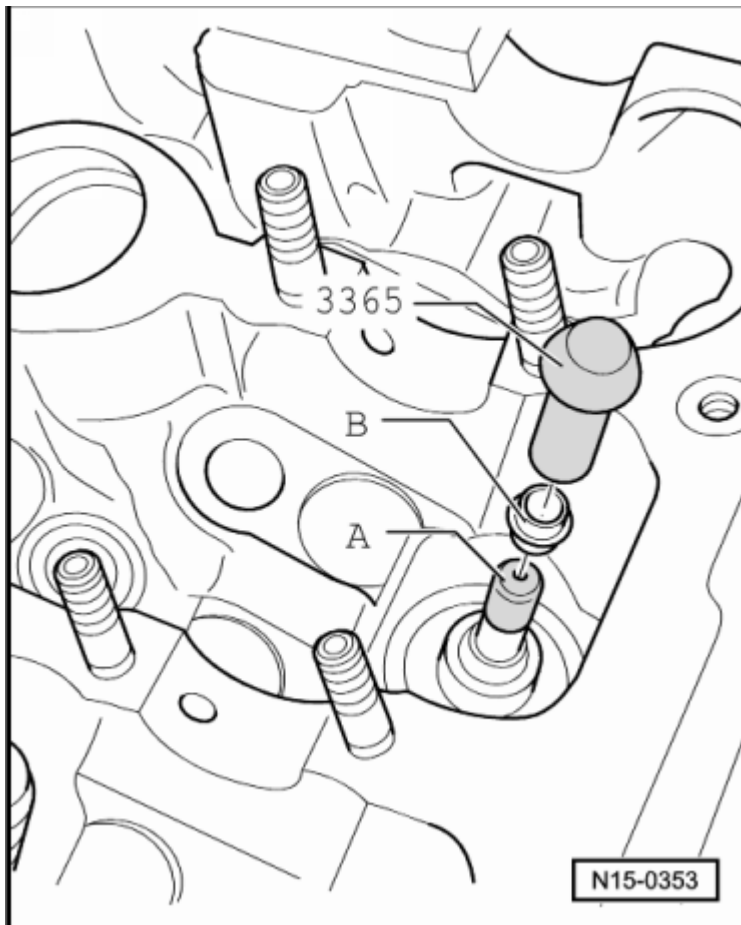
Identifying Plastic Sleeve, Valve Stem Seal And Valve Stem Seal Driver 3365
